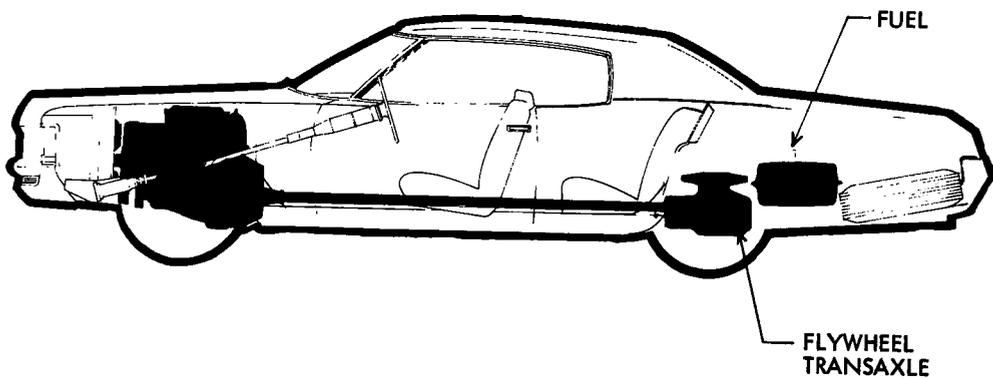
Drivetrain Arrangement for Transaxle Flywheel/Transmission
